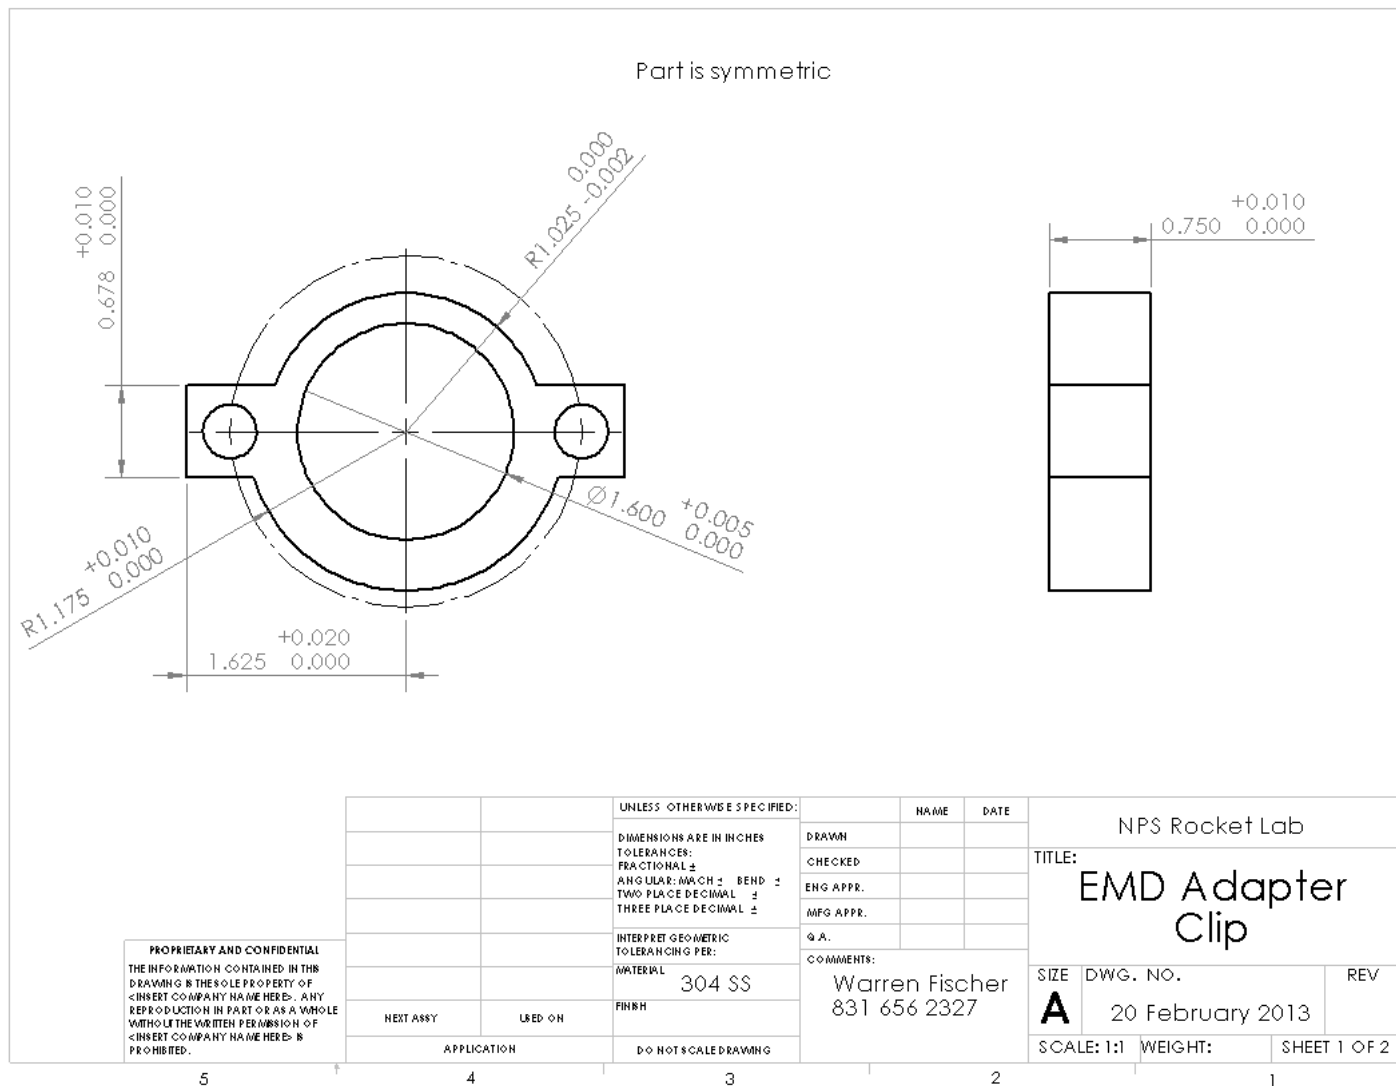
EMD Injector Adapter Clip Fabrication Drawing (View 1 of 2)
